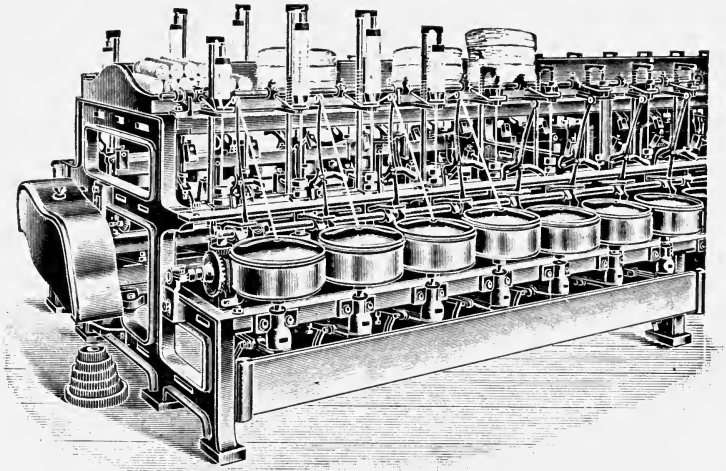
Cup-Spinning Machine (Tatham & Co.).
